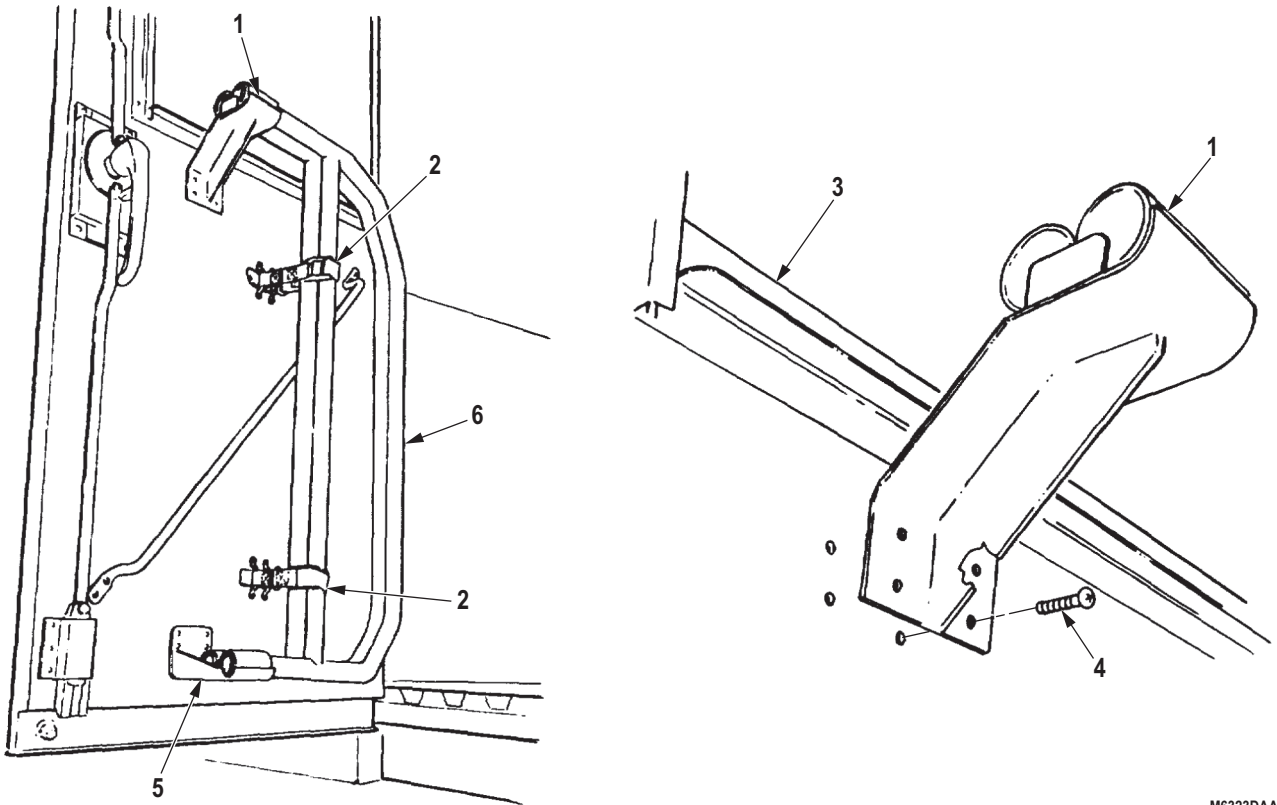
Van Handrail Component Installation (M934/A1/A2).
